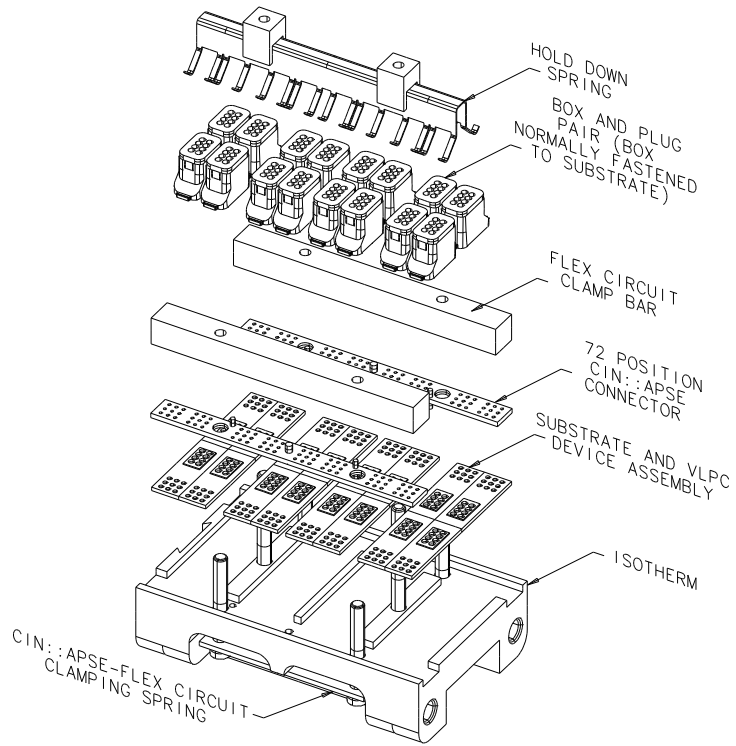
Cold-end assembly for one 128-channel module of a VLPC cassette.
